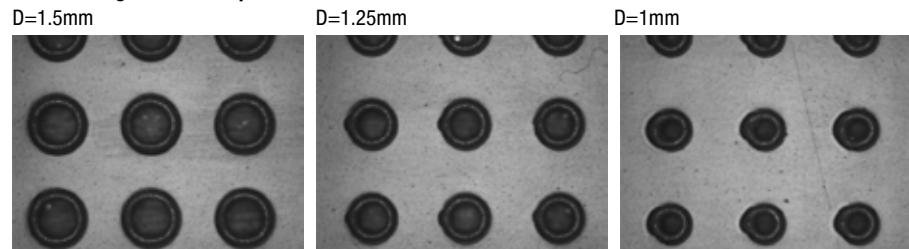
Typical solder paste dispensing for different circle diameter sizes.
